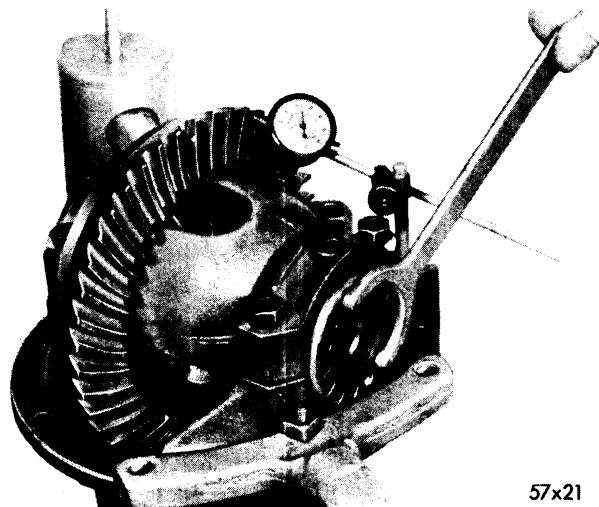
Checking Back Lash between Drive Gear and Pinion
